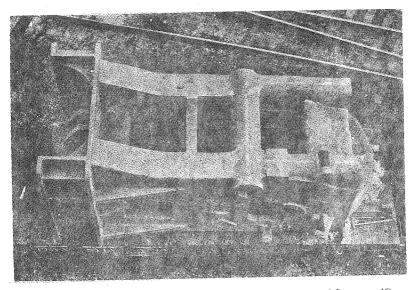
Large intricate casting. Note size relation to railroad flat car. (Courtesy of Continental Foundry and Machine Co.)
